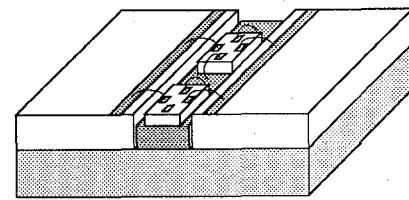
Side-section of the chip showing "not shaped" carrier.
